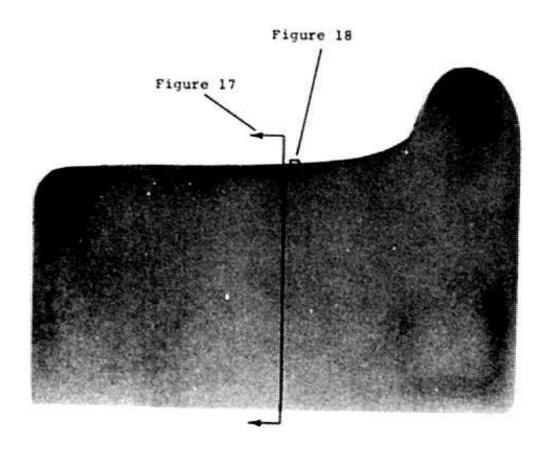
MACROSTRUCTURE OF RADIAL-AXIAL SECTION OF RIM OF WHEEL NO. 6. NITAL ETCH (ACTUAL SIZE)
